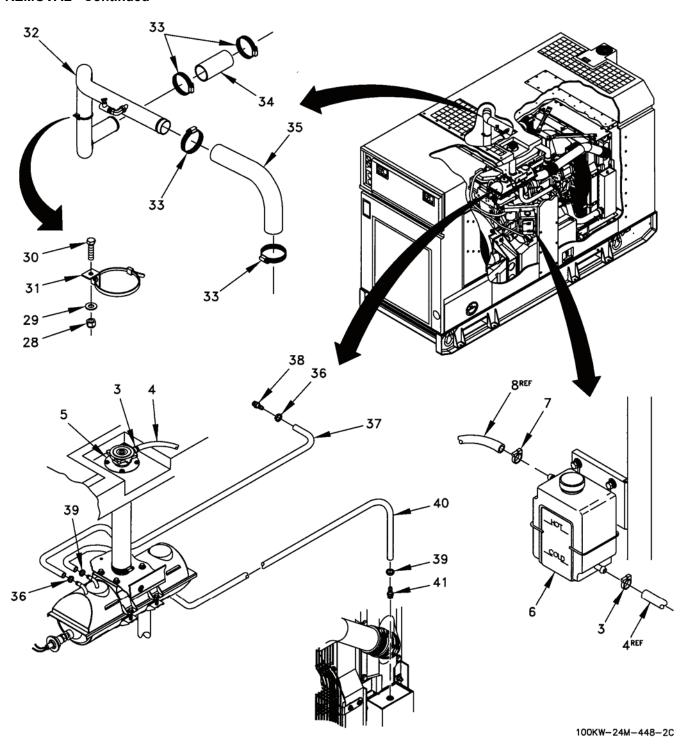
Coolant Hose Assemblies (Sheet 2 of 2).
